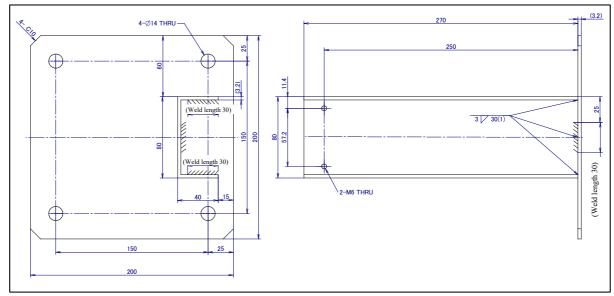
(b) External dimension of the stand for air filter (A97L-0318-0664)
